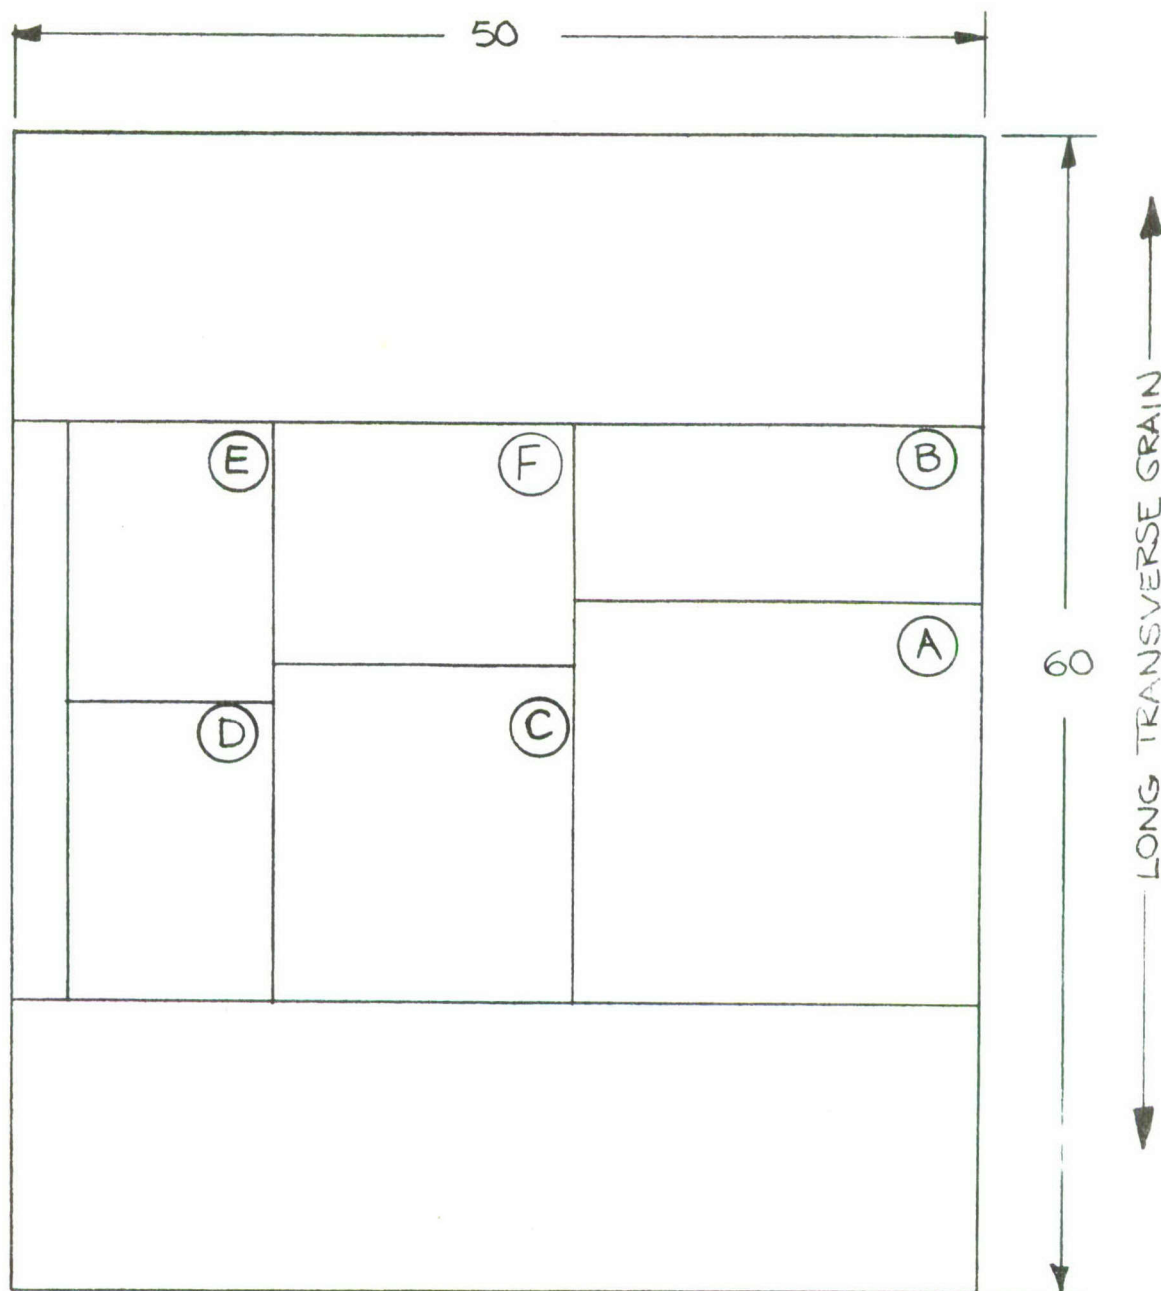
Detail Layout of Specimen Blanks in 7050-T73651
